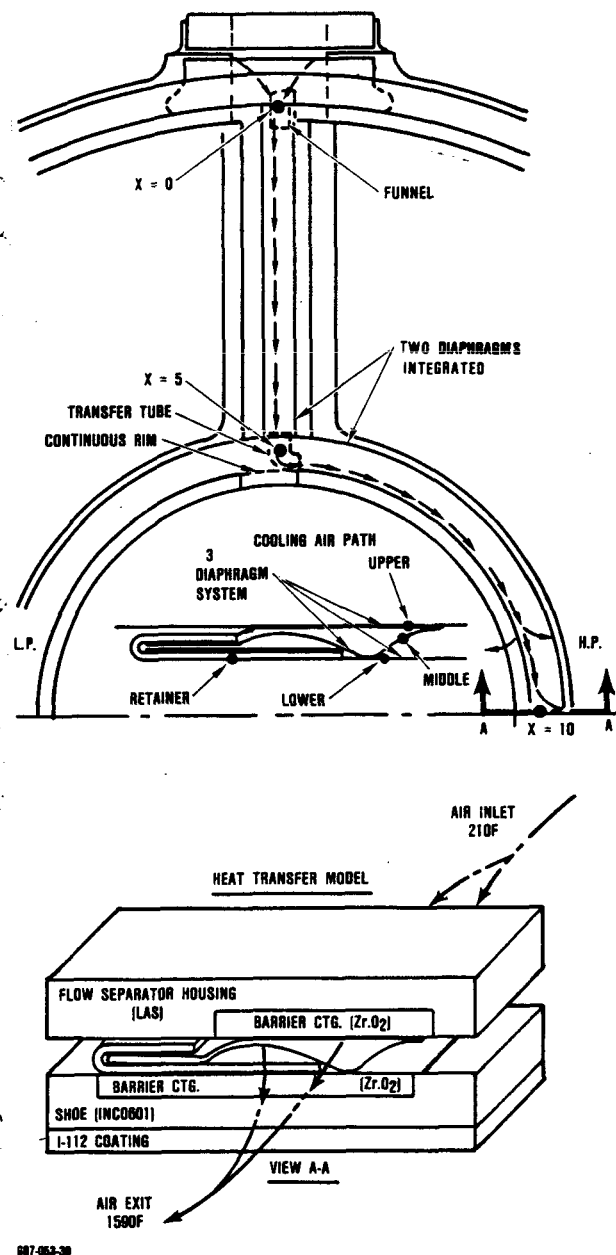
Inboard Seal Crossarm Diaphragm Cooling Schematic.
